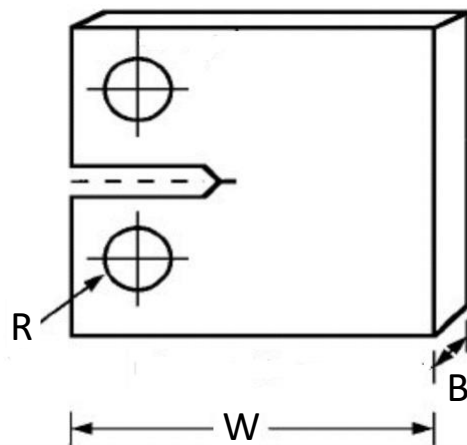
Geometry of Compact Tension Specimen used in Fatigue Test
